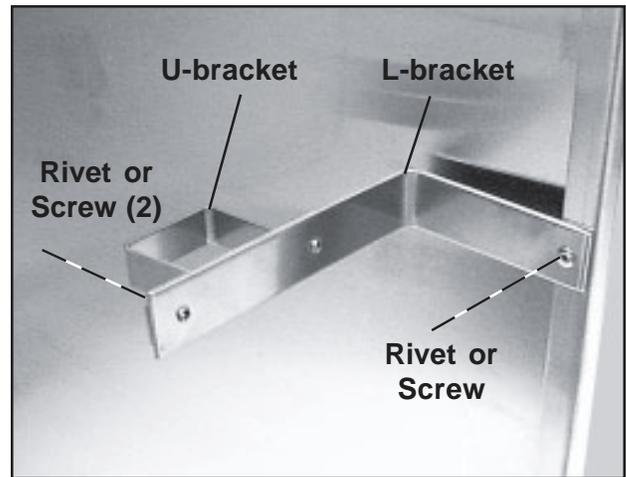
Mounting the L- brackets & U-brackets to the Rear Table Leg
